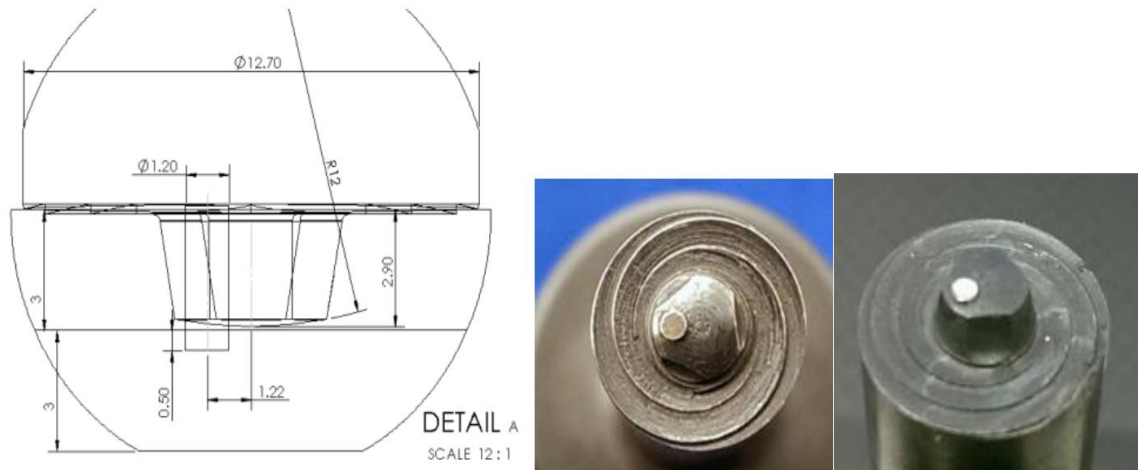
FSW tool (W-C-Co) applied for welding 1 mm thick AA6022 to 3 mm thick cast aluminum.
